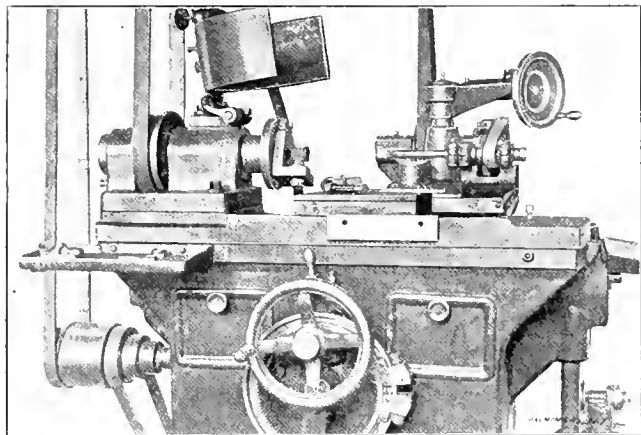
Grinding the Holes in the Universal Joint Pivots
